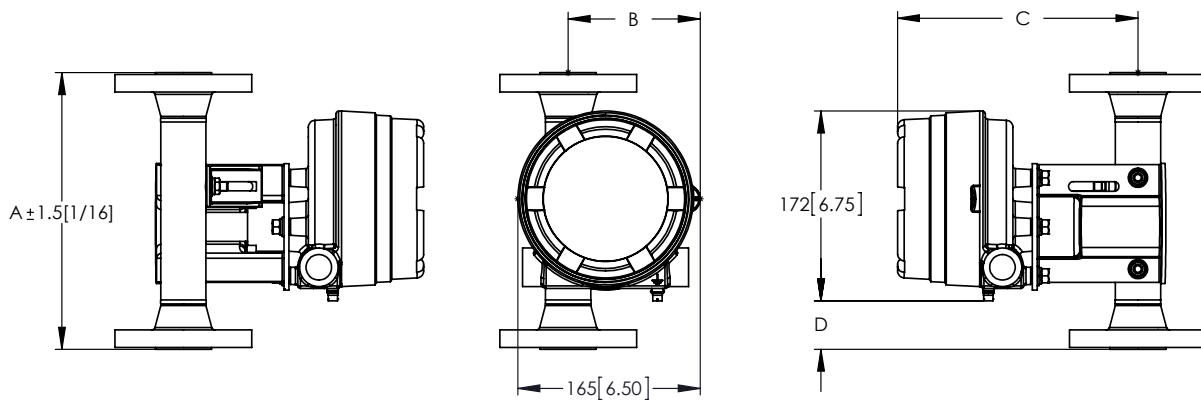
Model MT3809 and MT3810 Dimensional Drawings (mm/in) and Weights (kg/lbs) - Intrinsically Safe Housing
